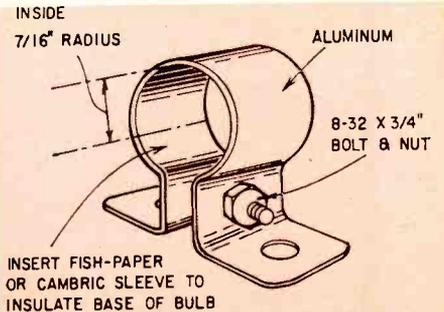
Details of the holder for bulb ballast. Socket must be insulated from holder.
